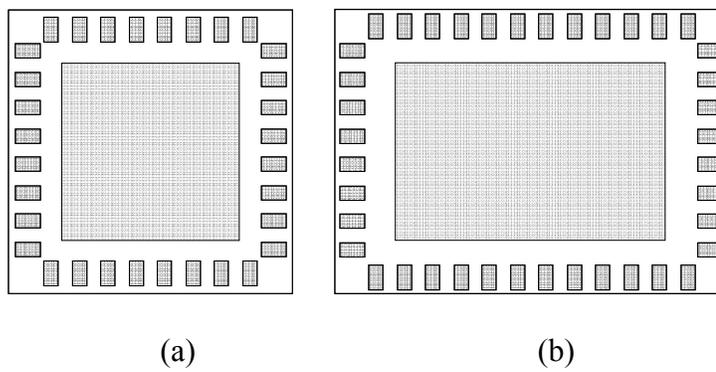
Bottom layer schematic of LGA packages: (a) U5 (b) U6 (rotated)
